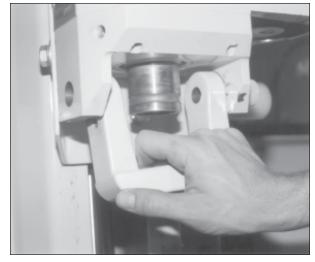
Pull left side of latch away from bottom plate extension.
